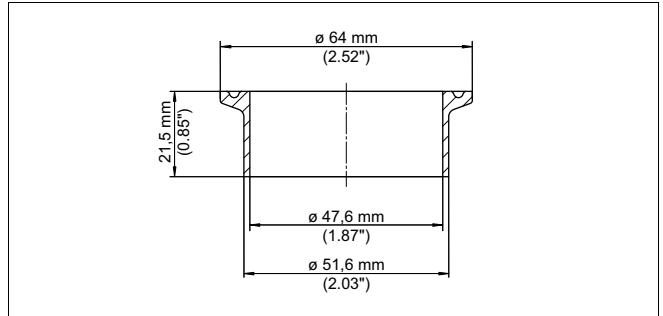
Dimensions welded socket Clamp 2" PN16 (ø 64 mm) DIN 32676, ISO 2852/316L
